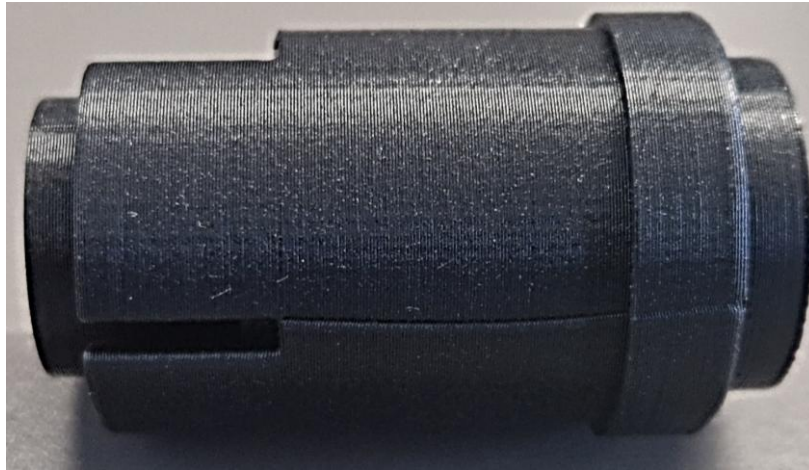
Maximum insertion of the inner tube using 0.2 mm clearance
